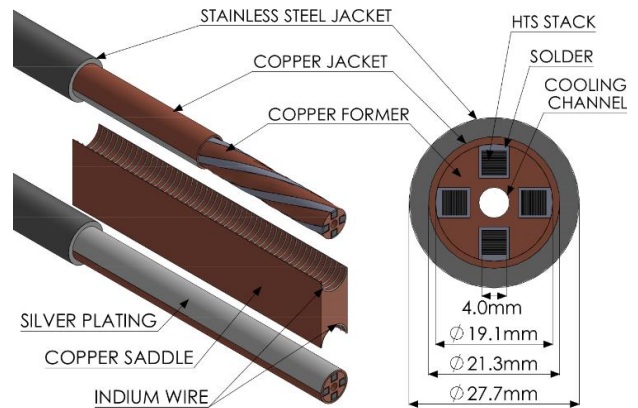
An example of a joint between VIPER cables as tested in SULTAN: A copper saddle joint between two VIPER cables (left); A cross section of a single VIPER cable, showing the VPI soldered stacks within channels in the copper former surrounding a central cooling channel
